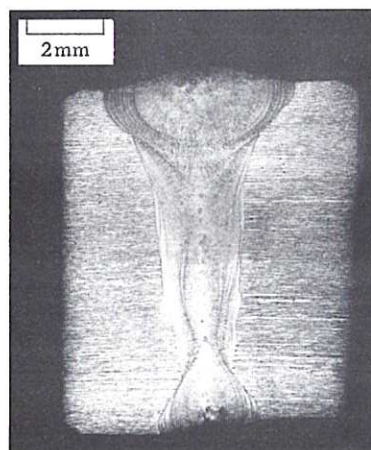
Appearance of welds in 168mm diameter tube.
